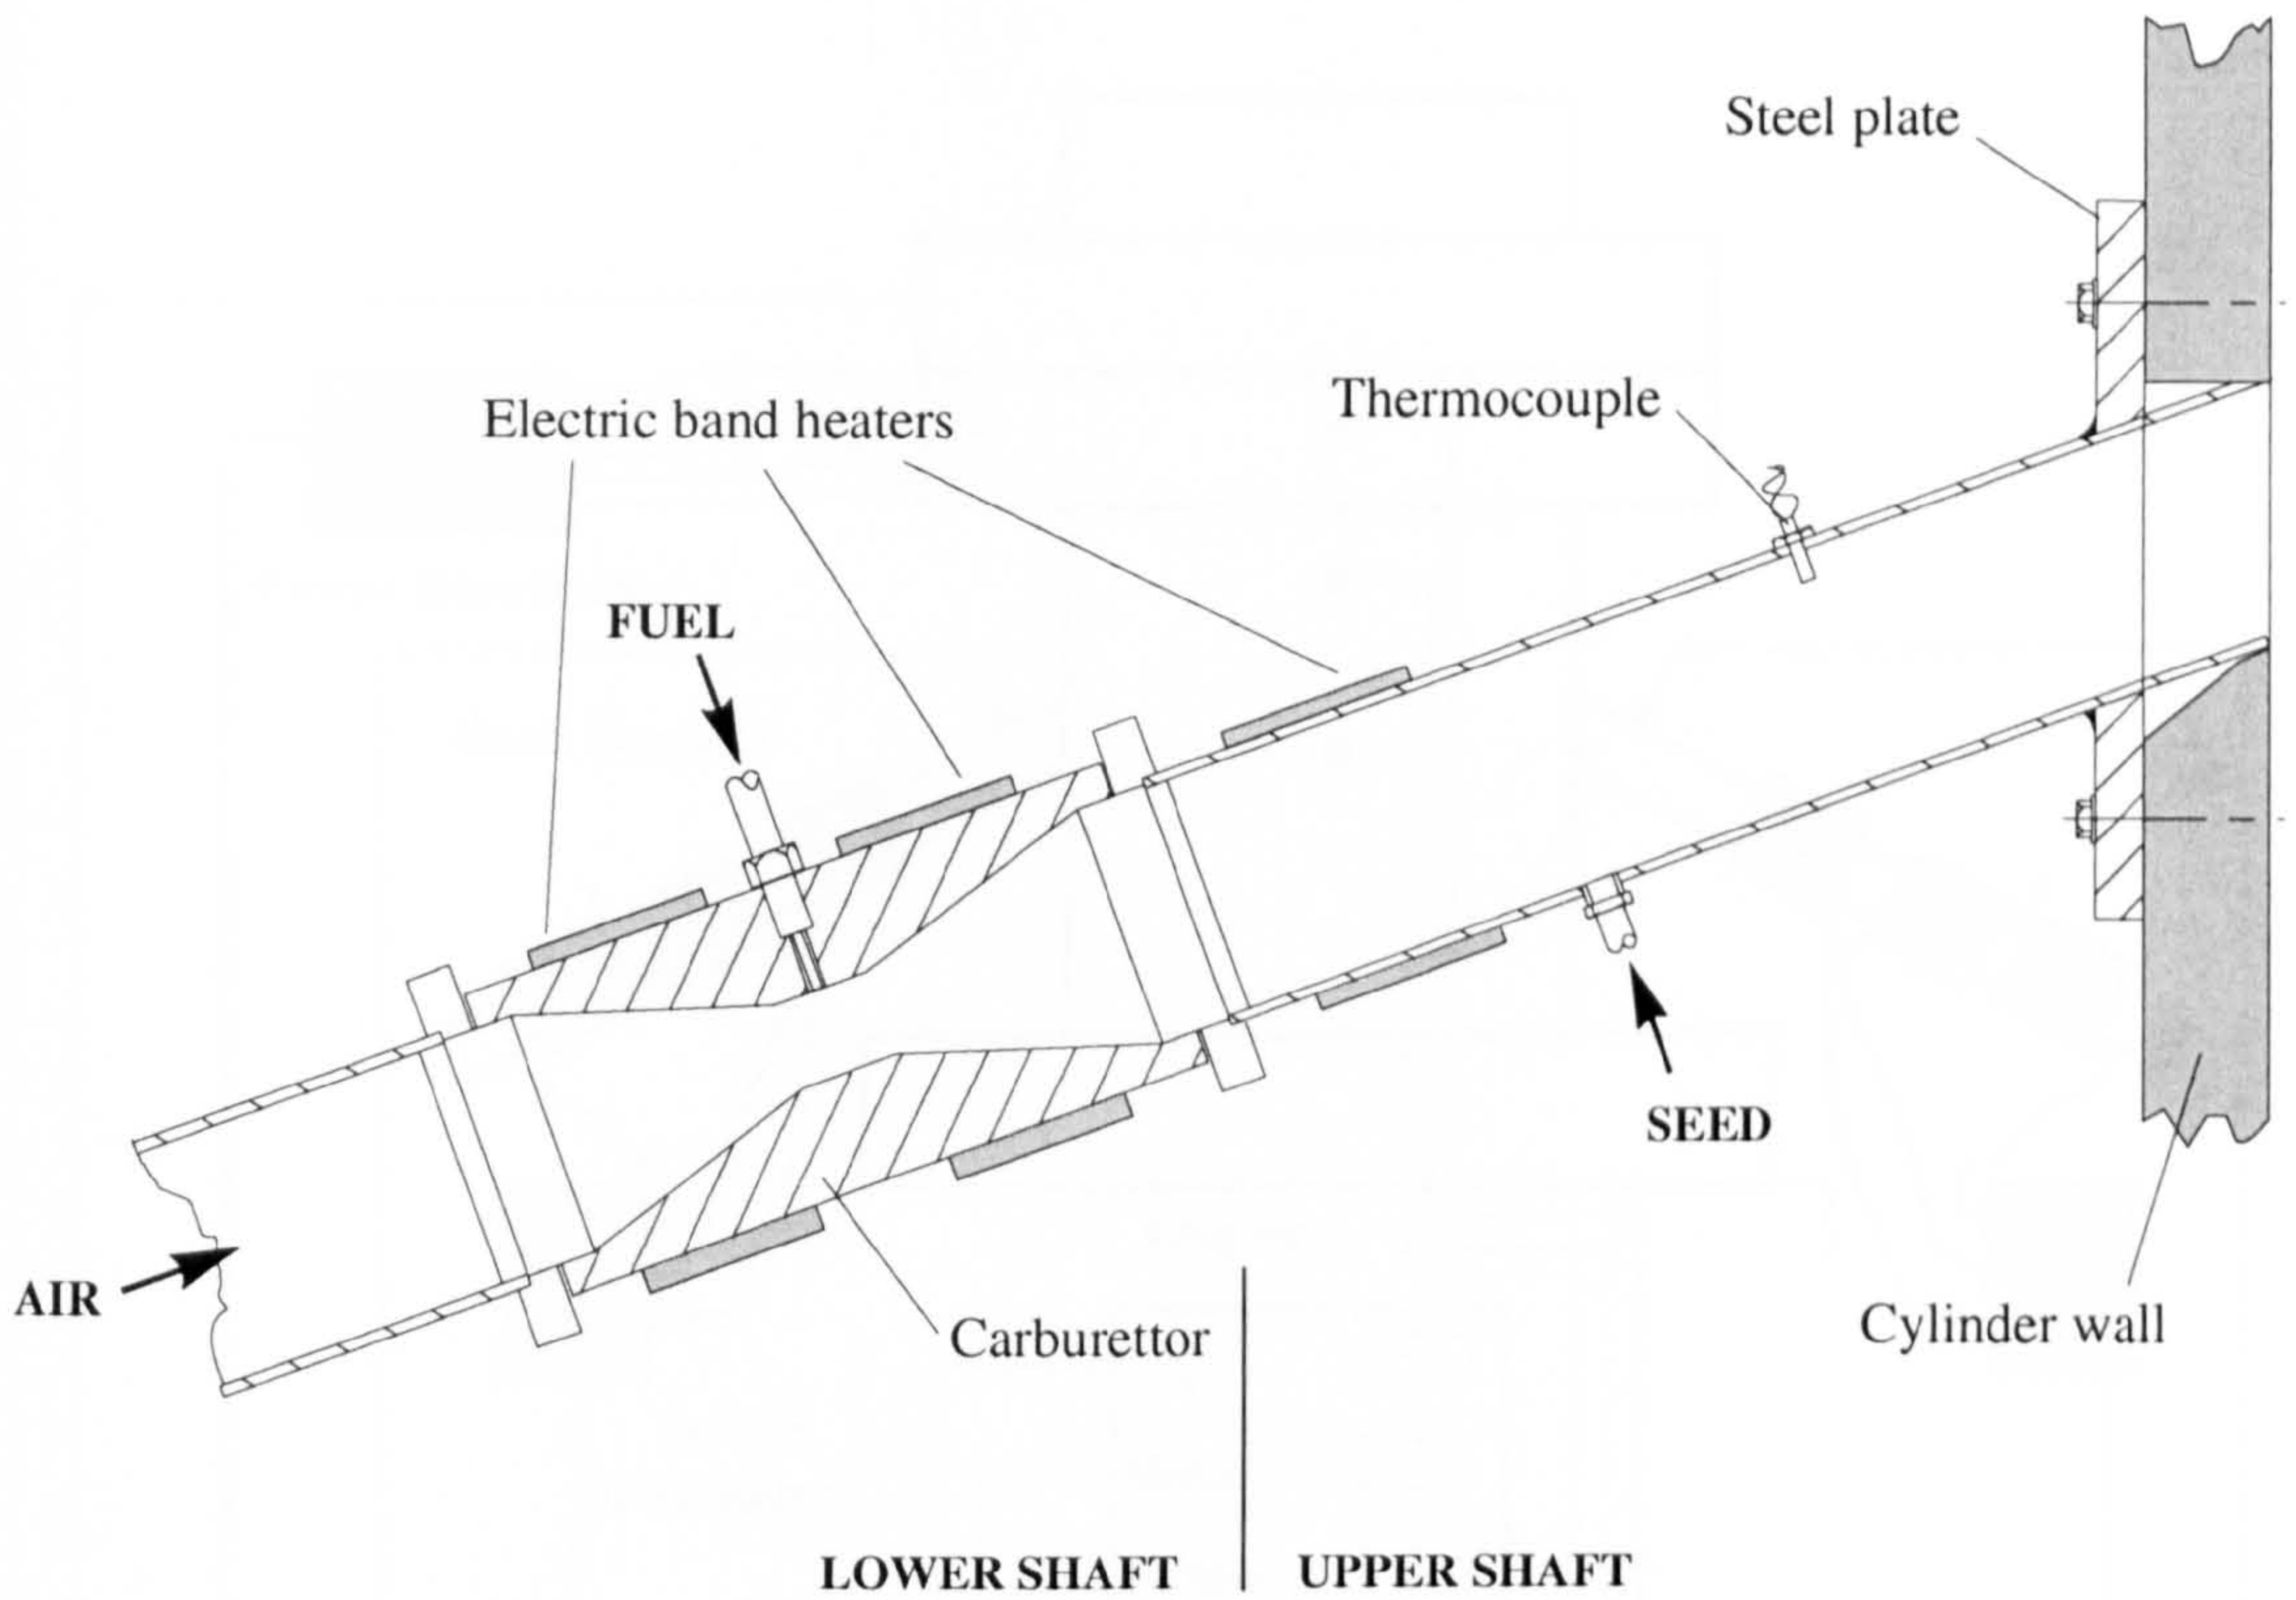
Inlet pipe assembly (drawn by Cairns, 2001).
